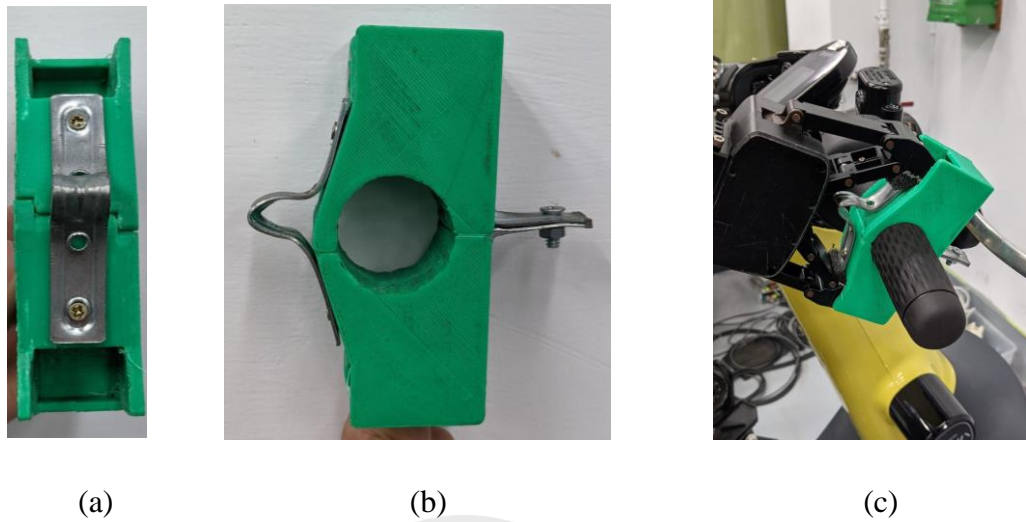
(a) Front view of 3D support equipment. (b) Side view of 3D support equipment. (c) 3D support equipment installed on the throttle.
